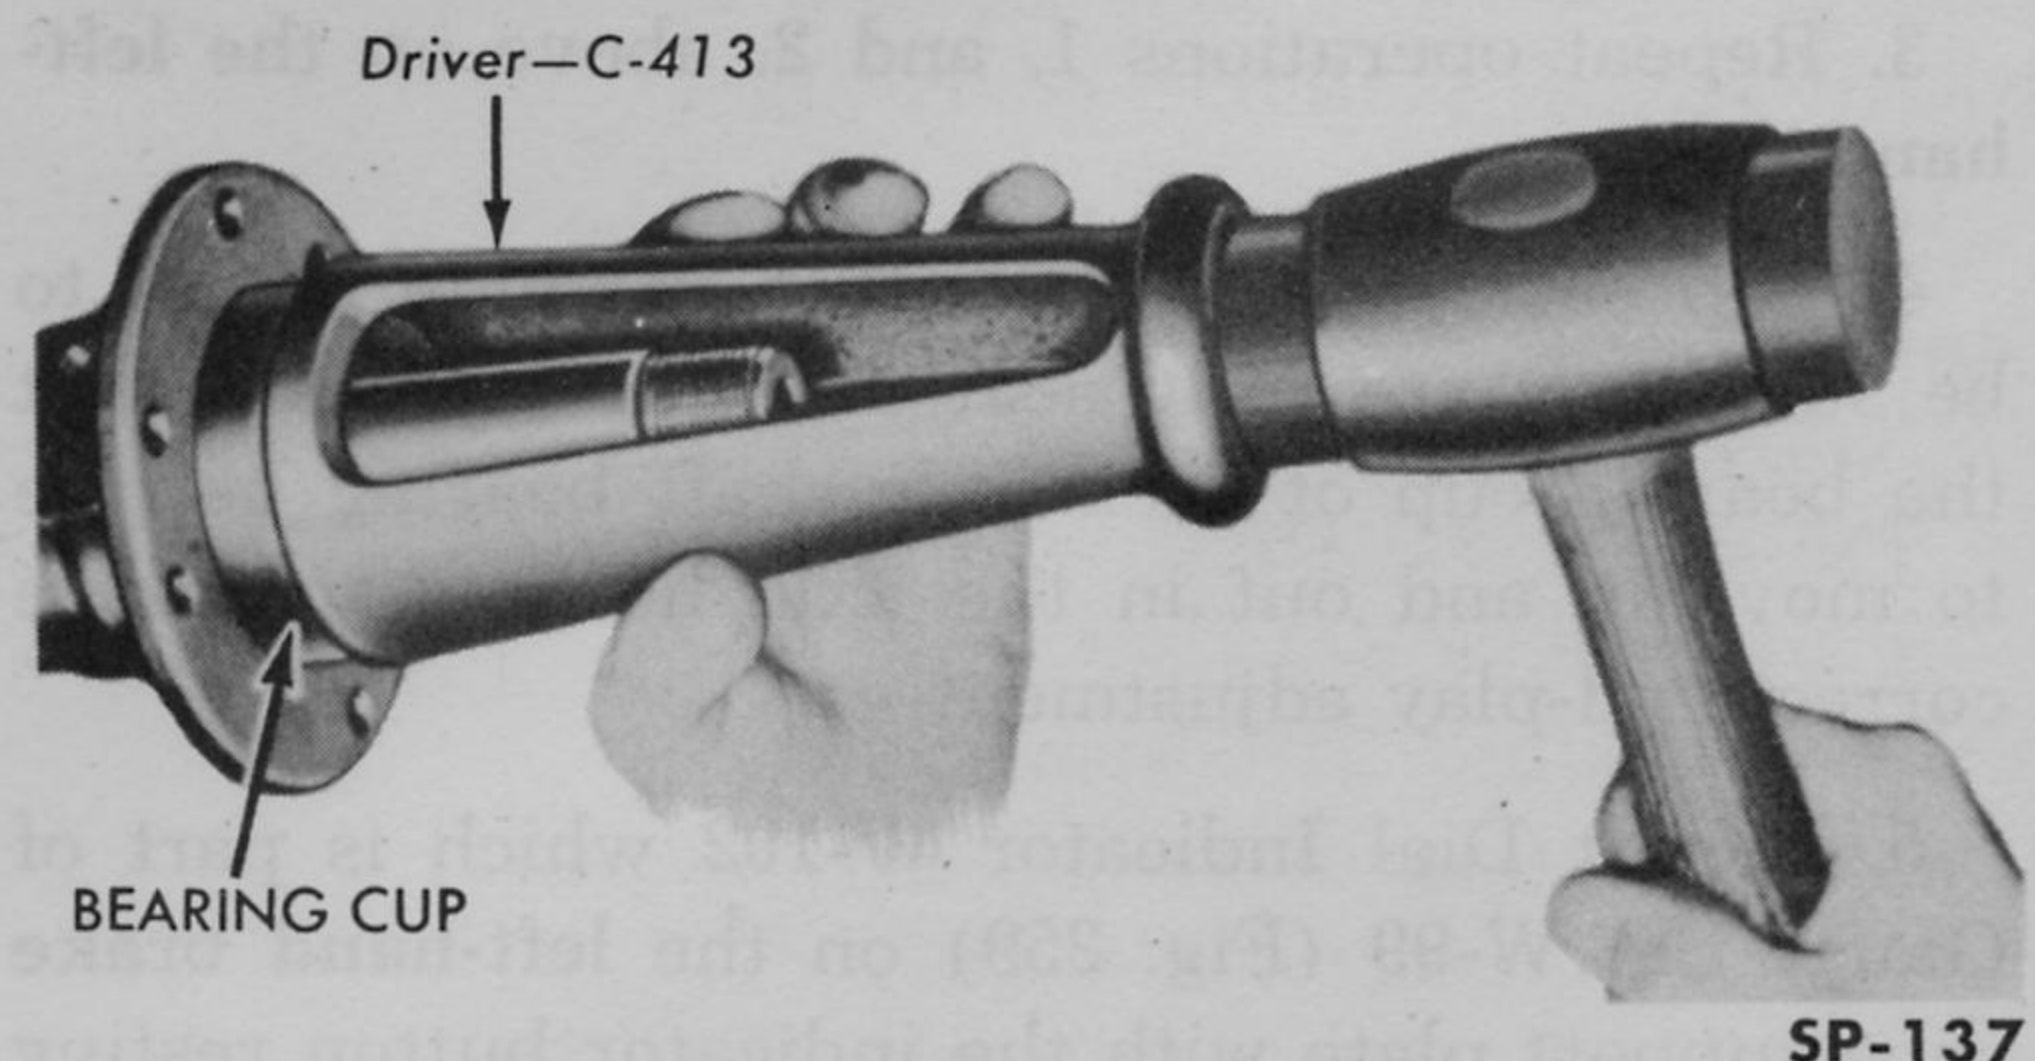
Installing Rear Axle Shaft Bearing Cup
